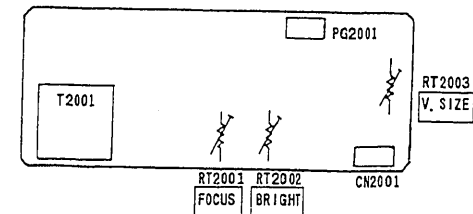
EMQ (Electronic Viewfinder) Circuit Board [Parts Side]
